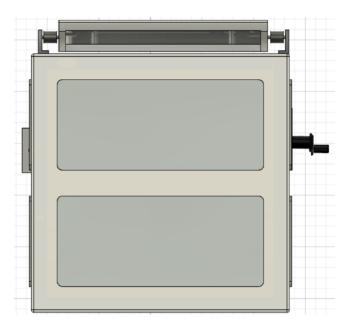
Sketch of the proposed washing machine design, viewed from the back. Designed using Autodesk Fusion 360.
